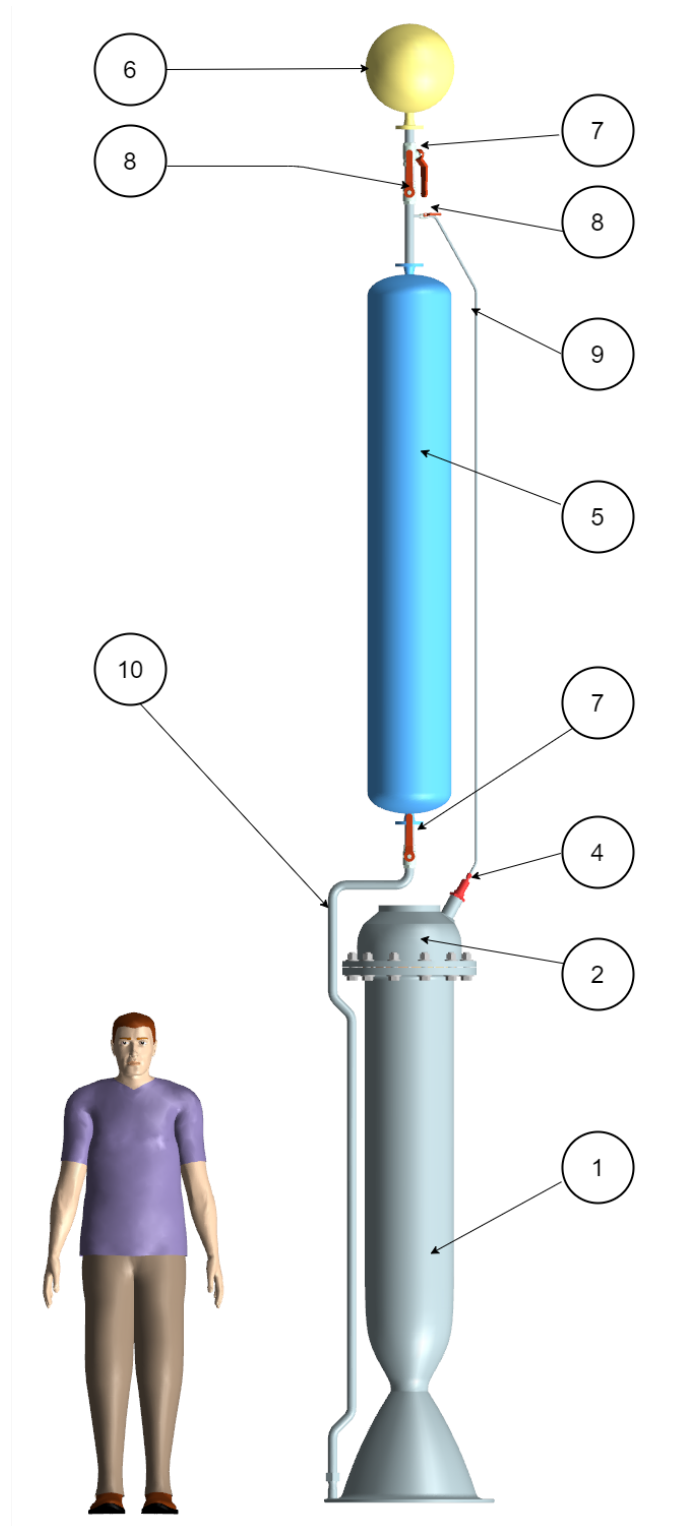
Engine in assembly: 1 - Combustion chamber and nozzle, 2 - Head casing, 4 - Igniter, 5 - Oxidizer tank, 6 - Pressurant tank, 7 - Shut-off valve, 8 - Pressure regulator, 9 - Helium bypass duct, feeding the igniter, 10 - Oxidizer duct, person to scale
